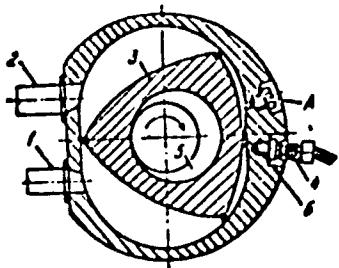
1--exhaust fitting; 2--intake fitting; 3--rotor in TDC position; 4--pickup; 5--eccentric shaft
